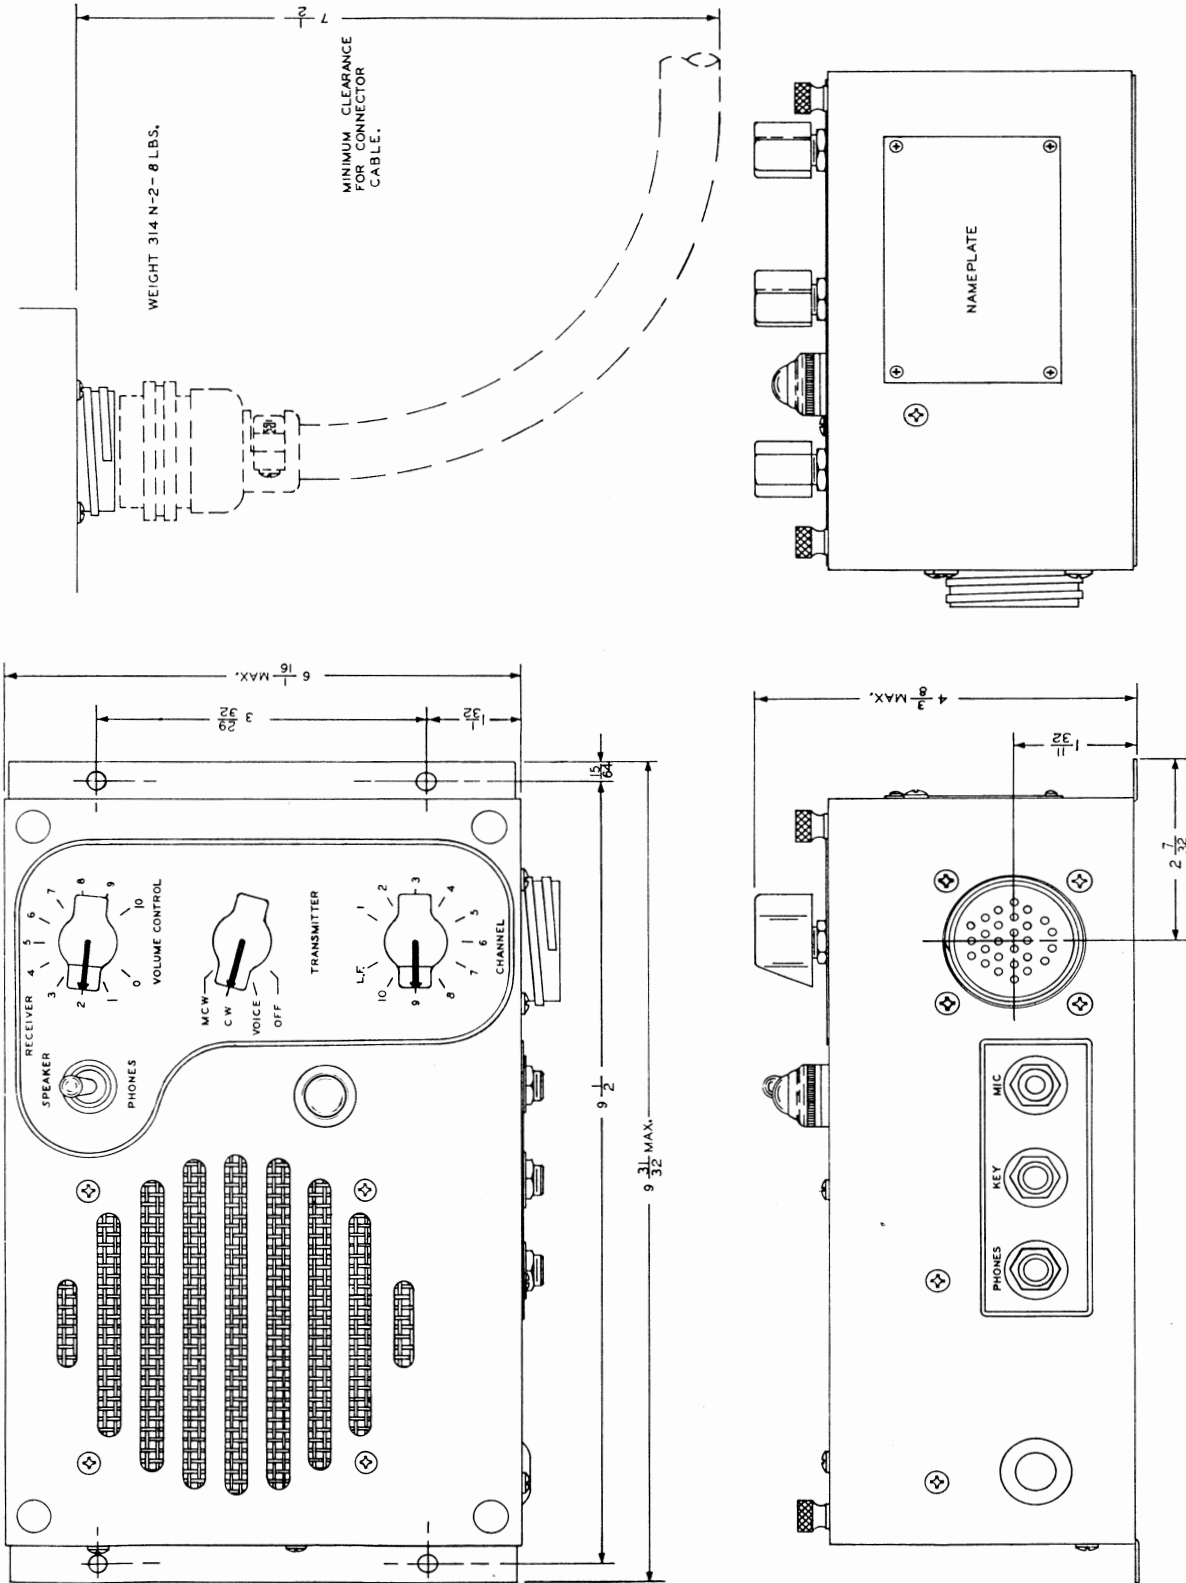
Type COL-23410 Remote Control Unit Installation Diagram (Dwg. No. K1104C)
